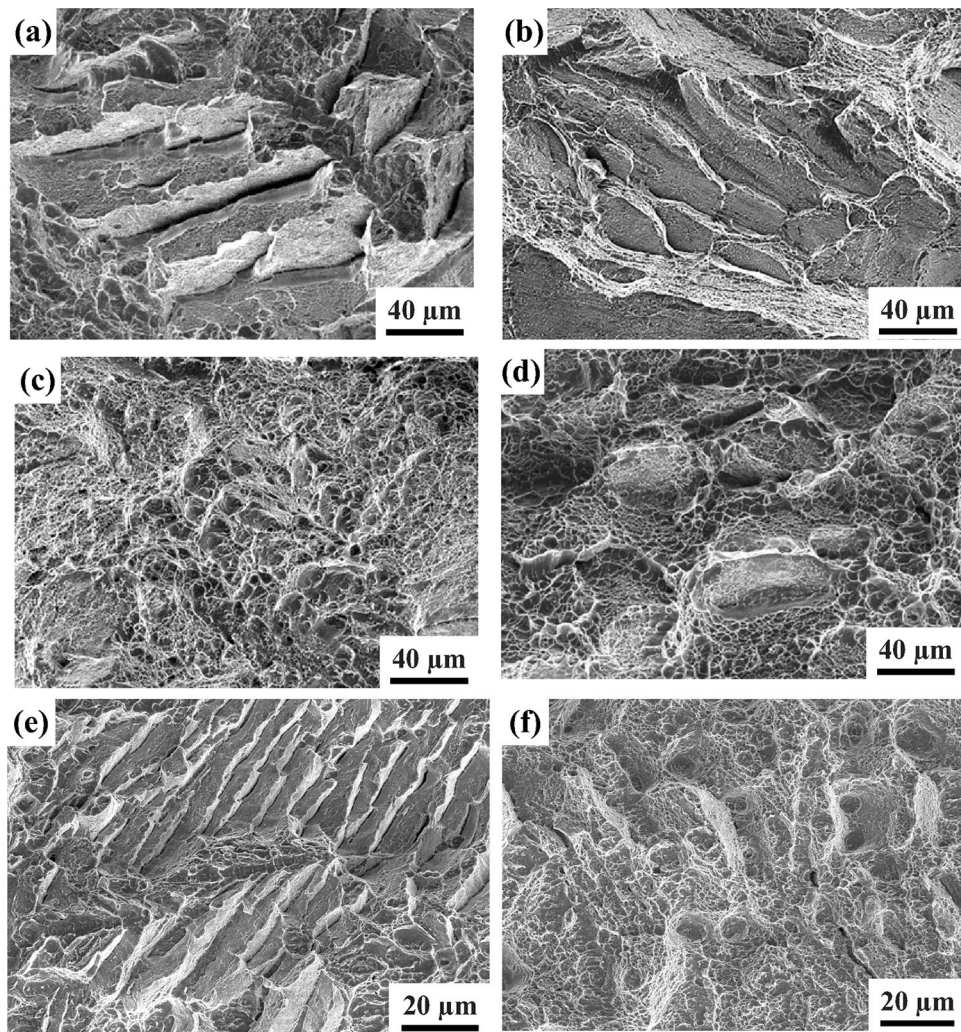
The typical fracture appearance of the (a) D426, (b) A371, (c) A593, and (d) D648 specimens after notched tensile tests; (e) D426 and (f) D593 specimens after fracture toughness tests
